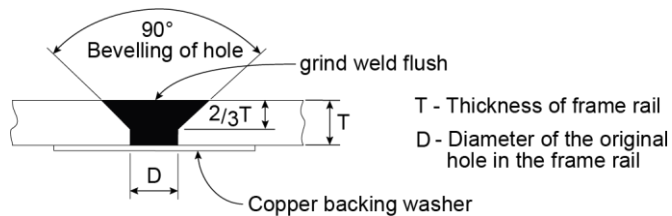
Example of preferred method for weld filling holes from one side
